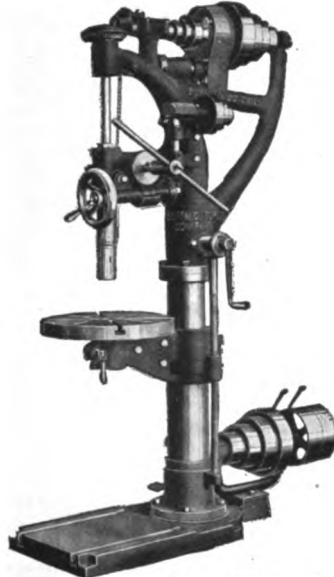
20-in. (508 mm.) DRILLING MACHINE, FLOOR TYPE
